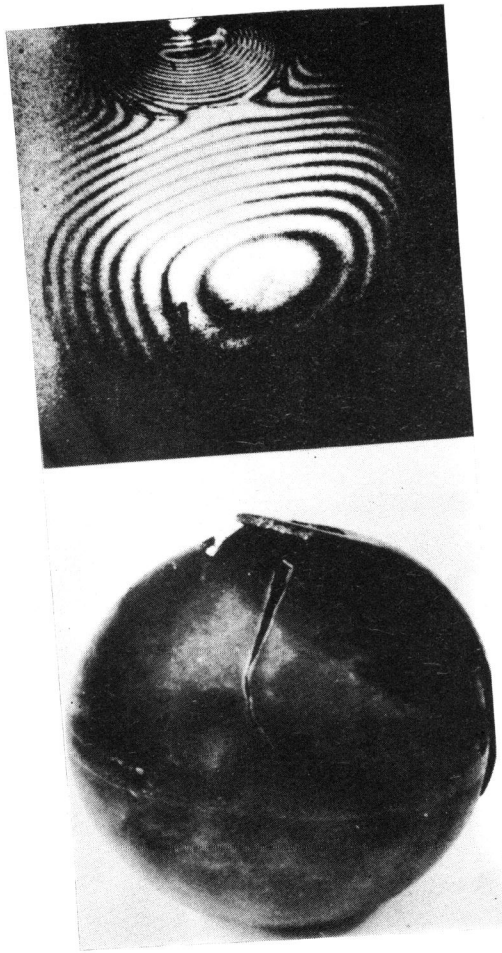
Interference fringe pattern in the spot of nozzle welding-up (a) and (b) is the photo of failure of the three-layer spherical shell 1
